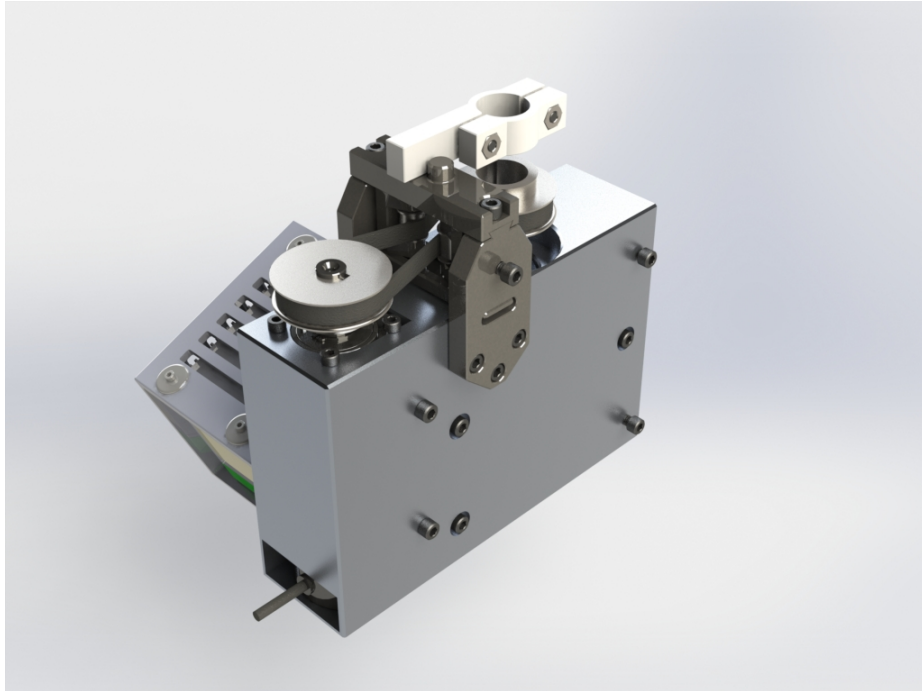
CAD of the torque motor mounting and belt tensioning systems.
